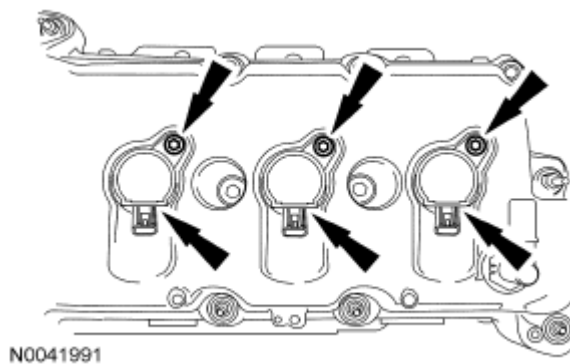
Locating LH Coil-On-Plug Assemblies And Bolts
